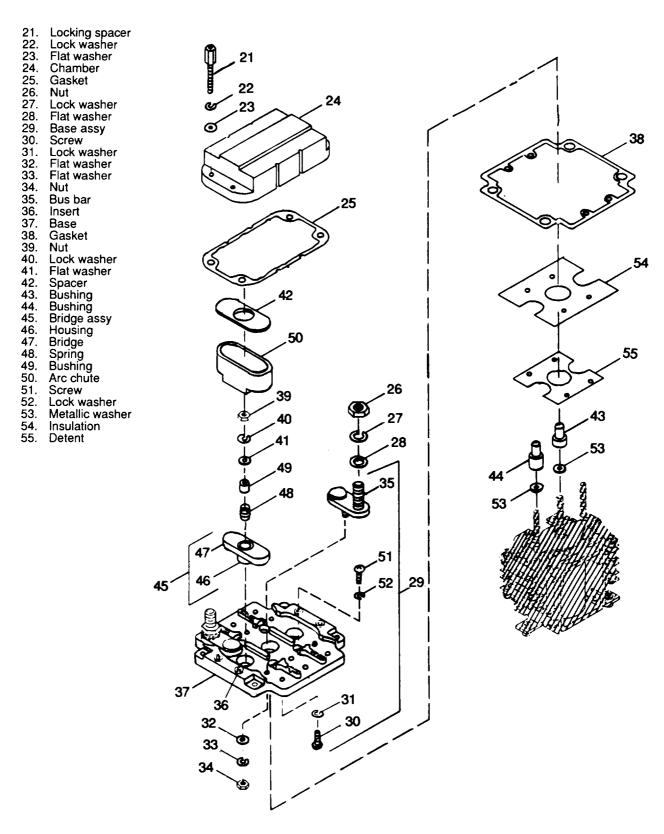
Main Load Contactor (Sheet 2 of 3)
